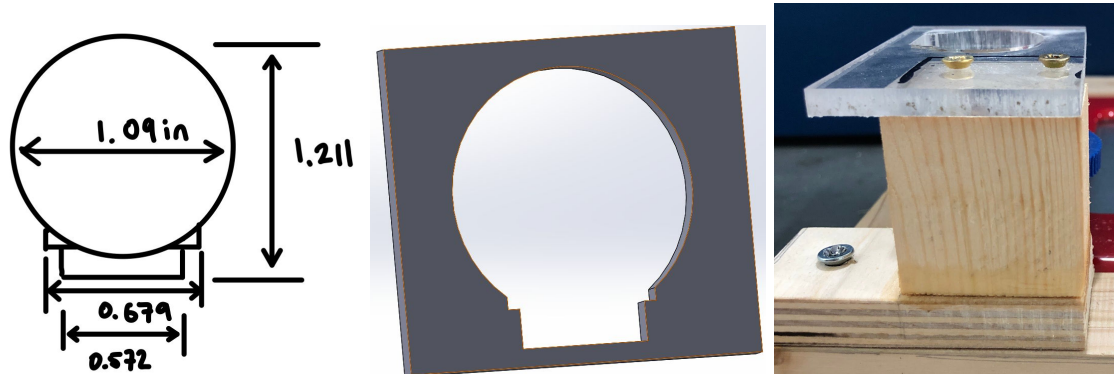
Motor dimensions sketch (left) CAD drawing for laser cut (center) Finished motor securing structure with pivot point (right)
